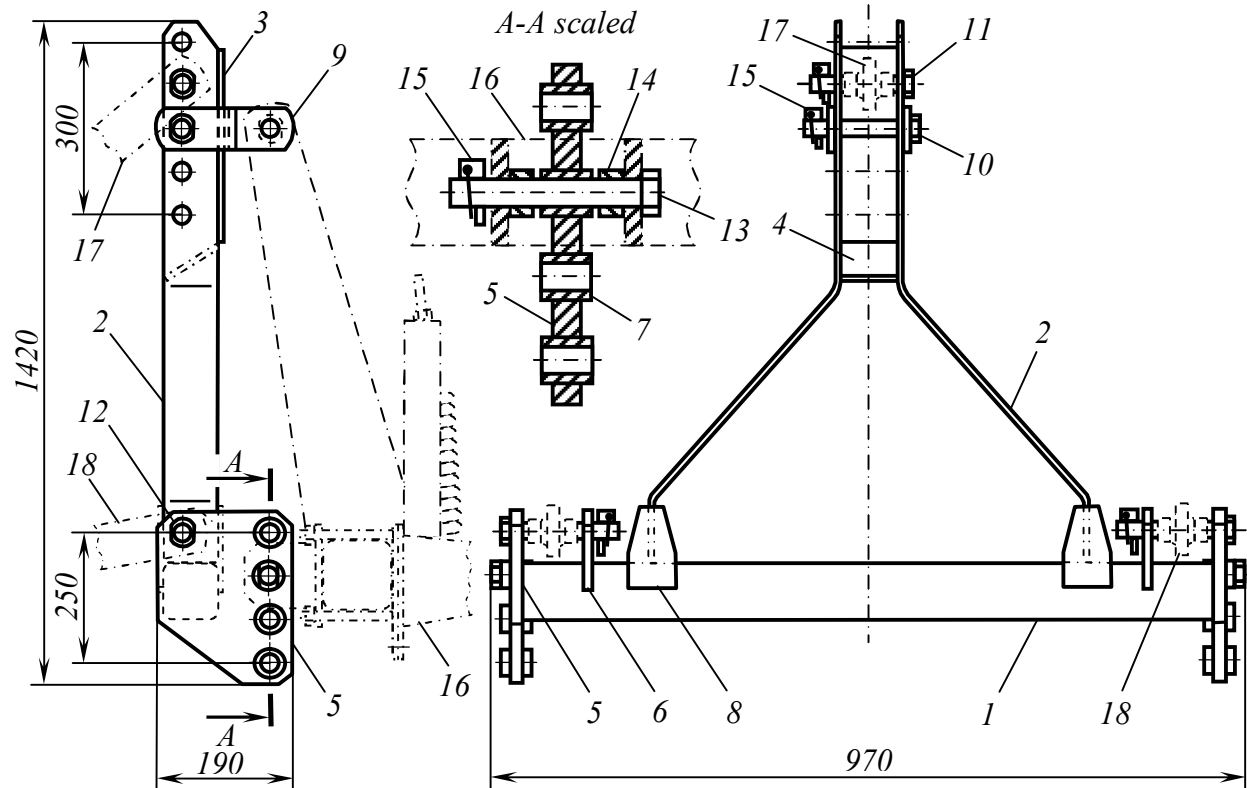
Device Mon to hitch tractor Unitized it with disc implements, not equipped with a coupler: 1 - timber; 2 - Front-brace; 3 - wall; 4 - strut; 5 and 6 - eyelets and the inner end face; 7 - Bush; 8 - kerchief; 9 - Earring; 10, 11, 12, 13 - the fingers; 14 - ring; 15 - check; 16 - cultivator; 17 and 18 - the upper and lower links of the tractor hitch
